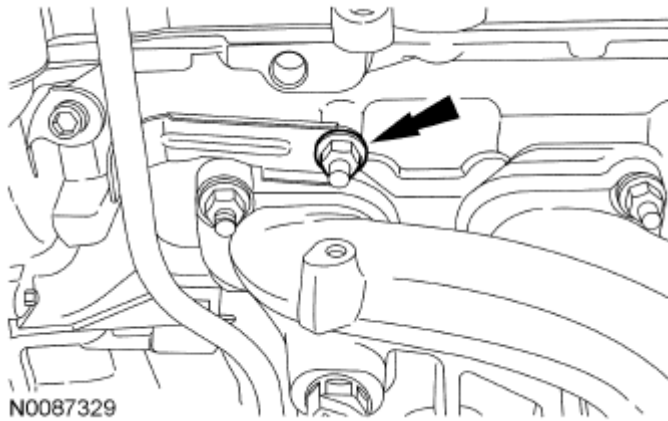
Identifying Oil Level Indicator And Tube With Stud Bolt
